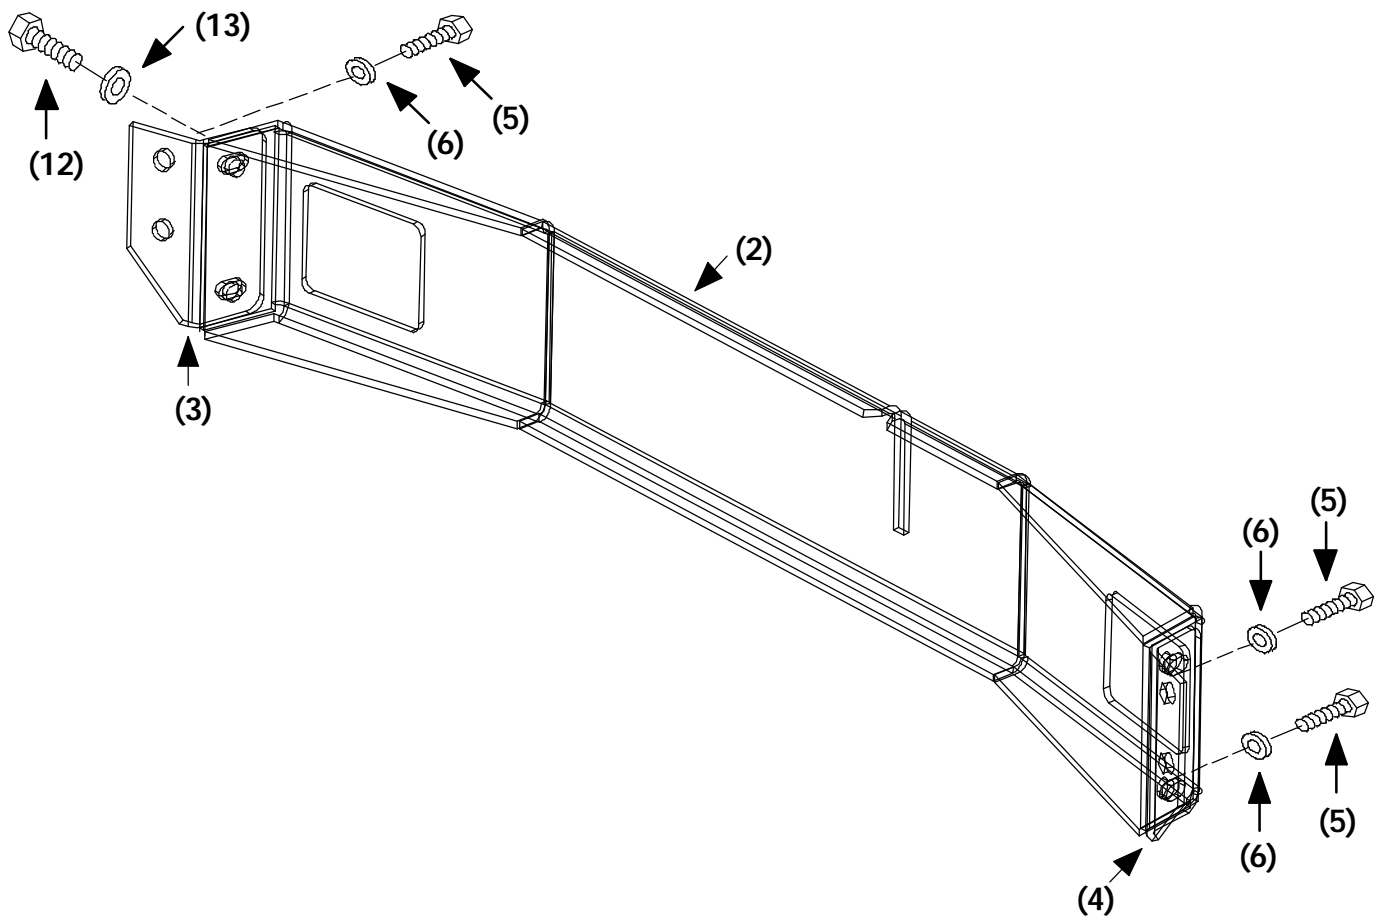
Rear Bumper, Mount Brackets, And Mounting Hardware
